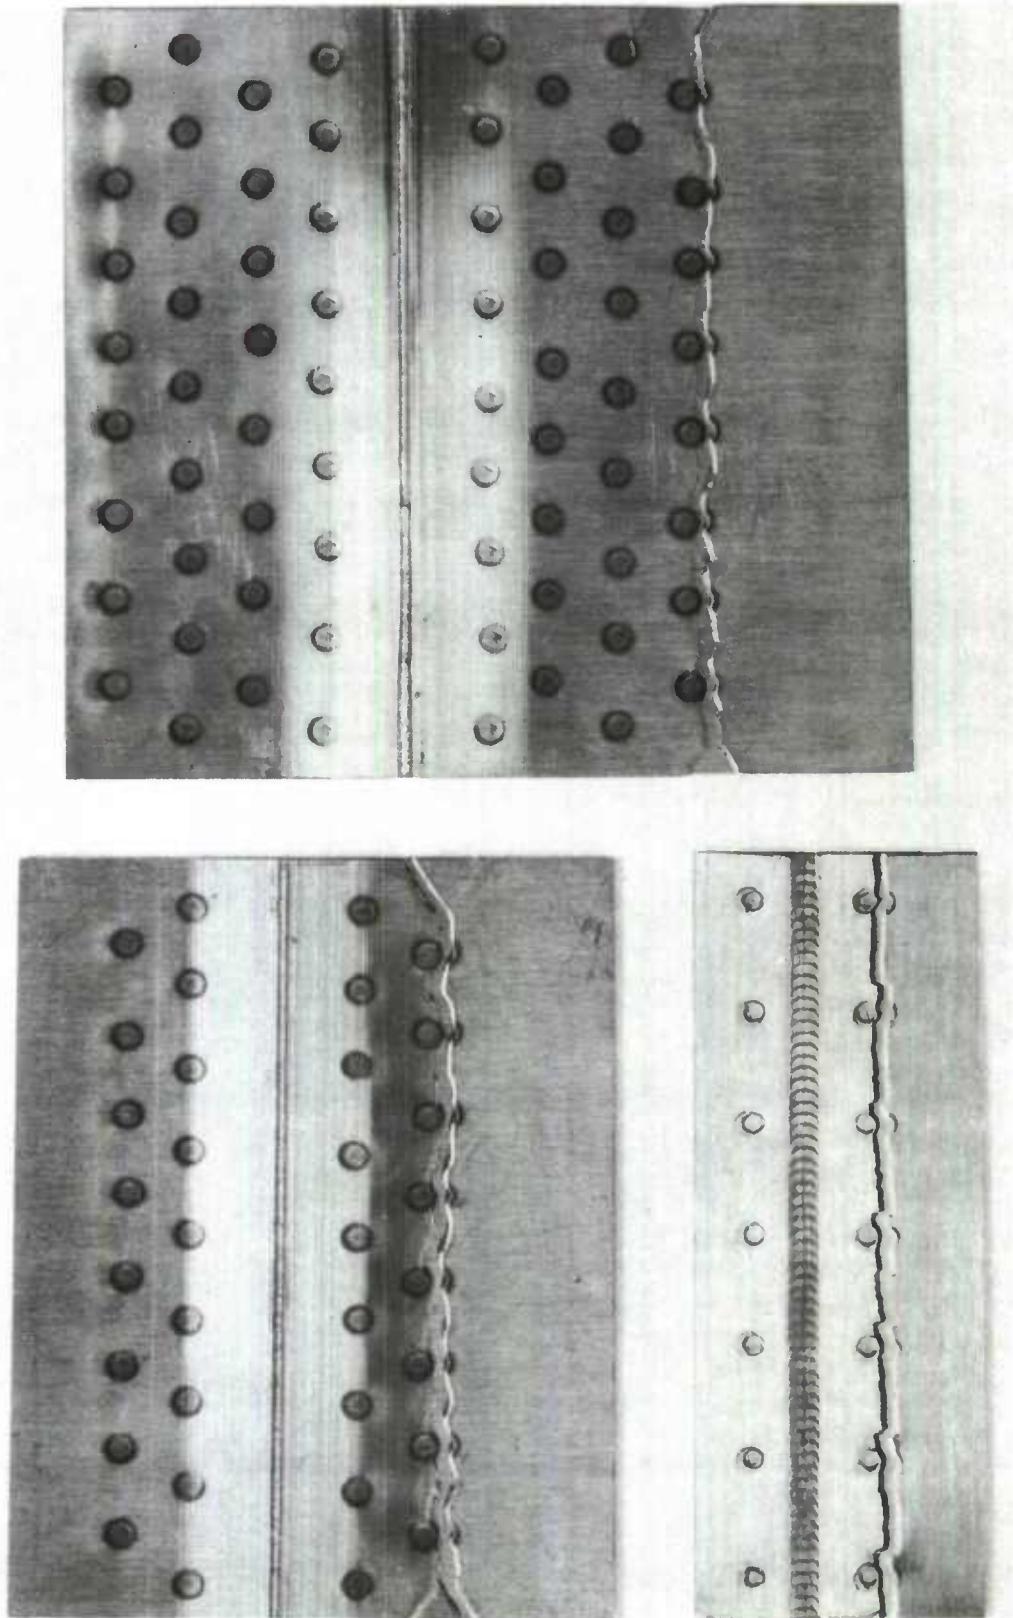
Fractured Fatigue Specimens - 301 SS (78° F)
